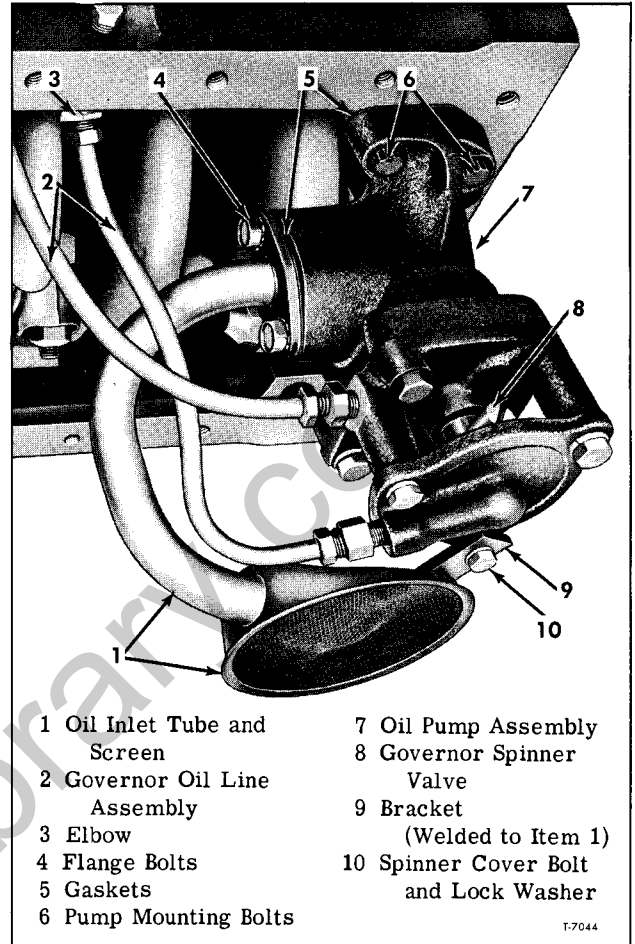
Engine Oil Pump and Governor Spinner Valve Assembly Installed (V6 Engine)
